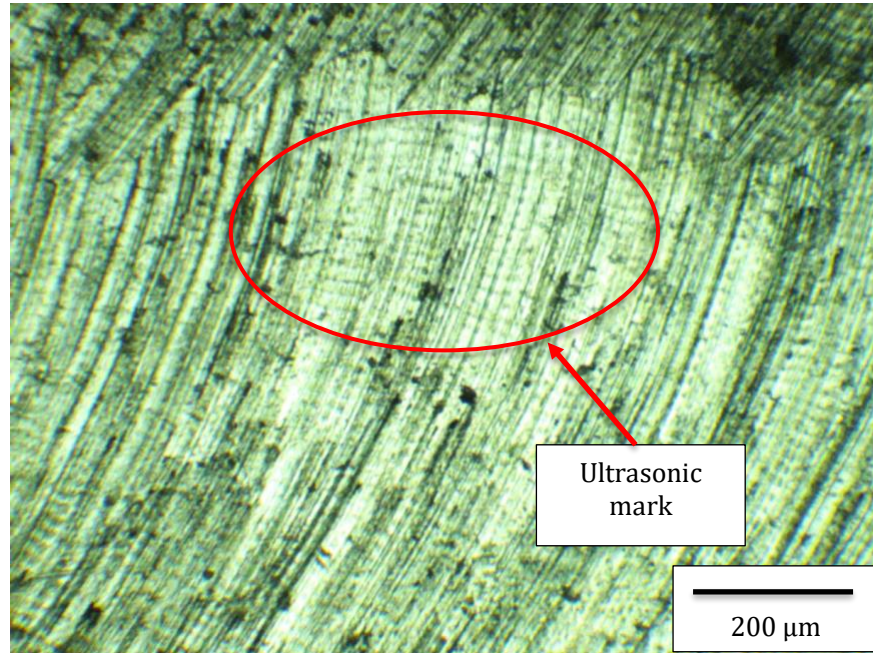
Ultrasonic marks on the machined surface of Inconel 718 (Run 1).
